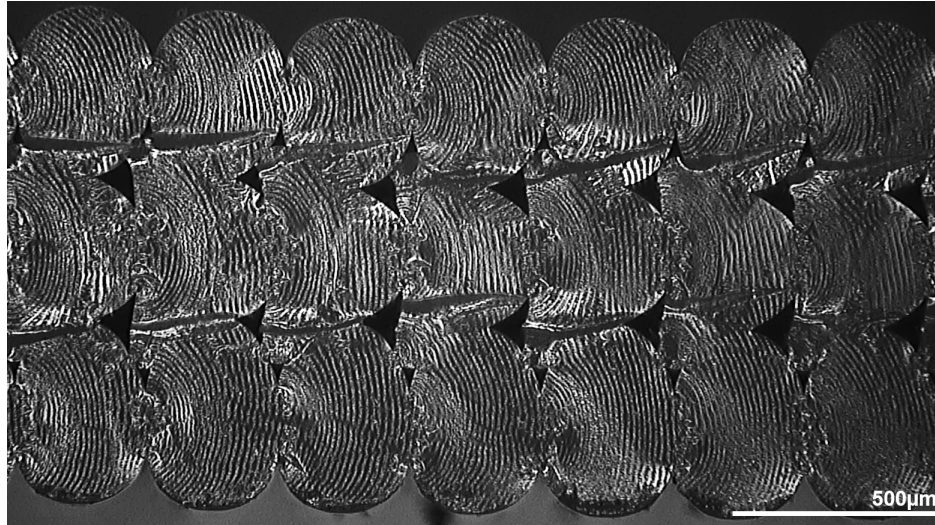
Image taken parallel to deposition direction showing continuous voids. Cut made by knife resulting in a rib-marks on the fracture surface propagating from left to right. The cutting process also caused the fractures between the voids.
